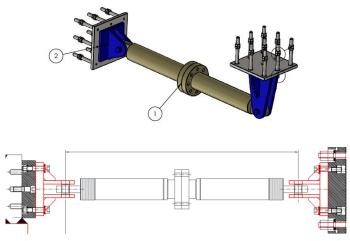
Initial drawing (top) and drawing of the test setup (bottom) of the coupled FVDs
